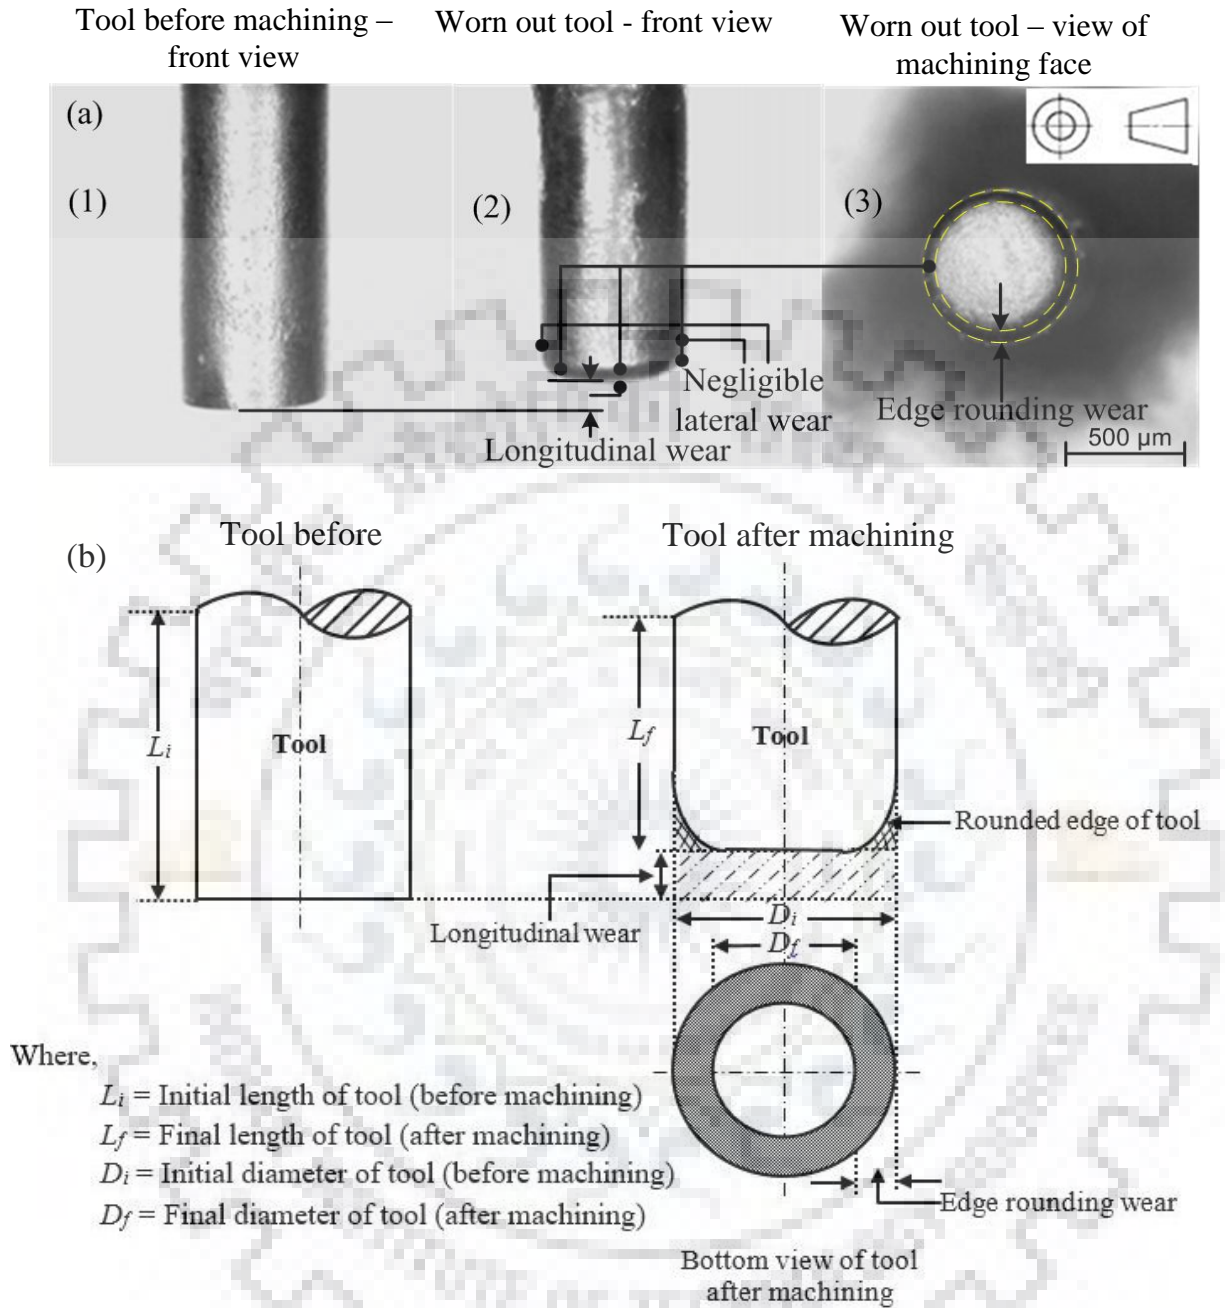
(a) Microscopic images of tool before and after machining (b) schematic illustration of tool wear in rotary tool micro-USM process
